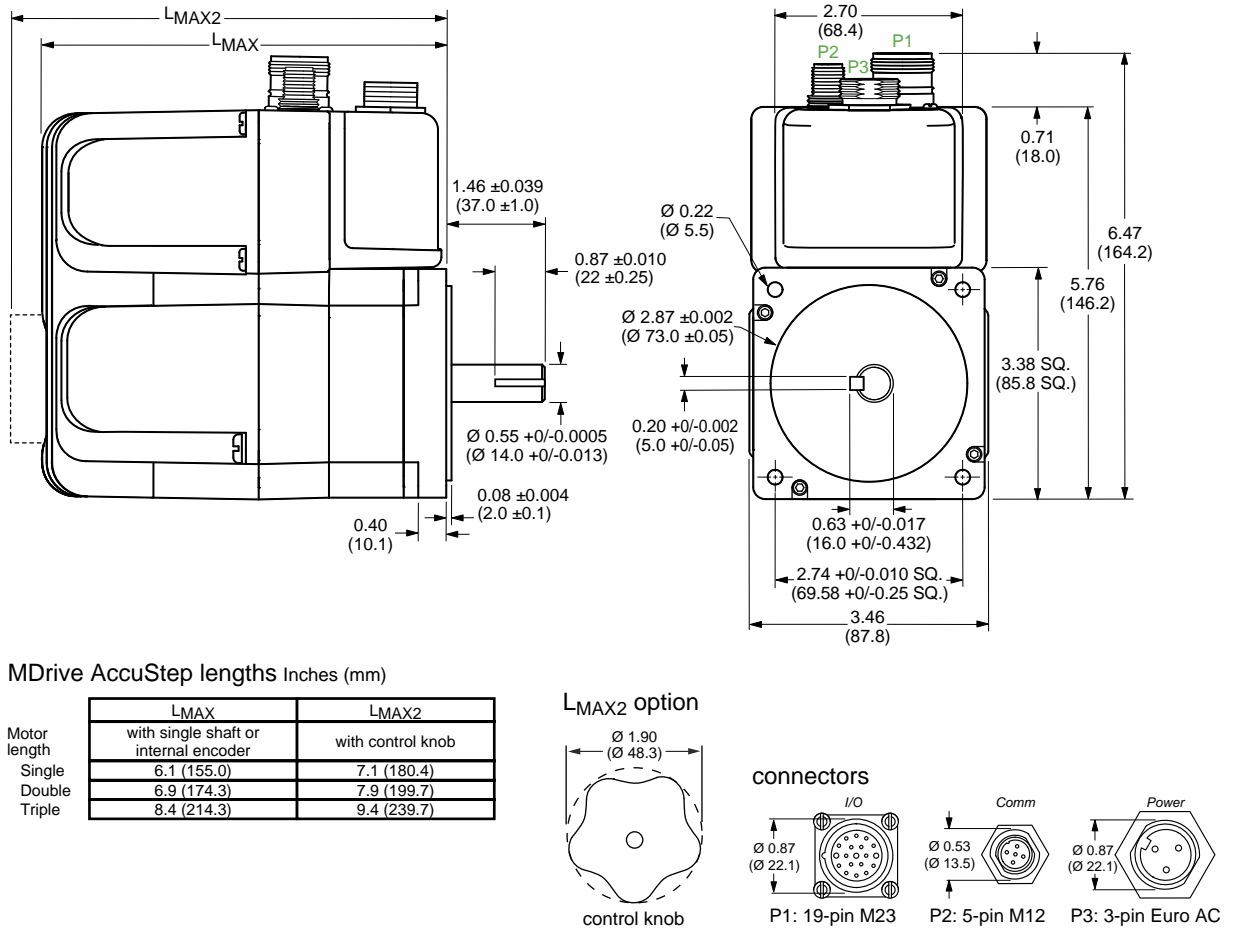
Mechanical specifications - dimensions in inches (mm)
